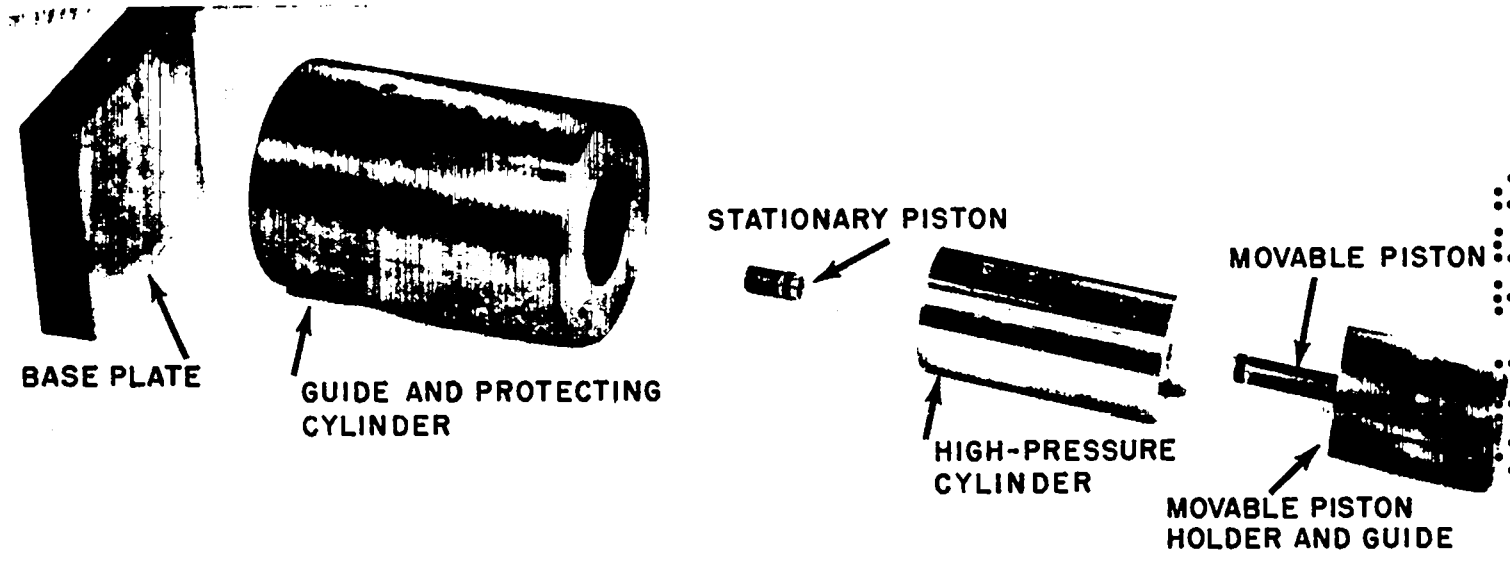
Exploded View of 10-Kilobar High-Pressure Chamber
